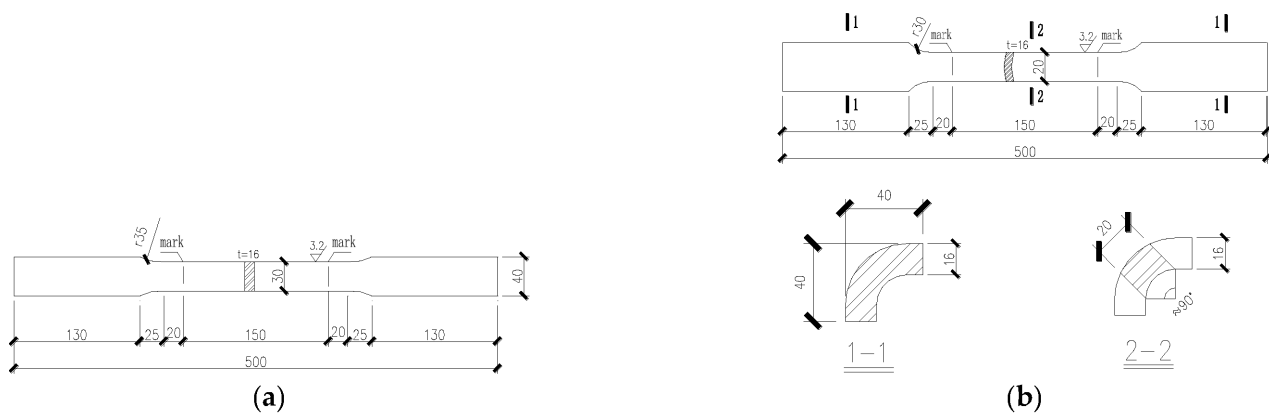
Size diagrams for material specimen fabrication (unit: mm): (a) flat-plate specimen; (b) corner specimen.
